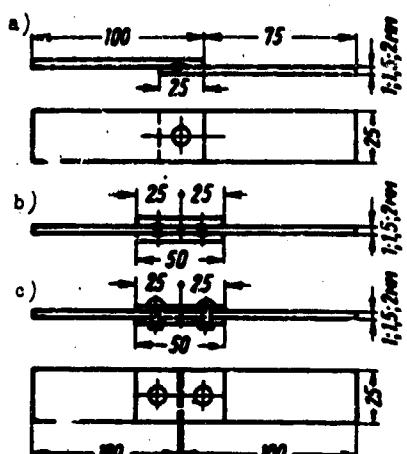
Samples for static tests: a) and b) glue-welded; c) glue-riveted.
